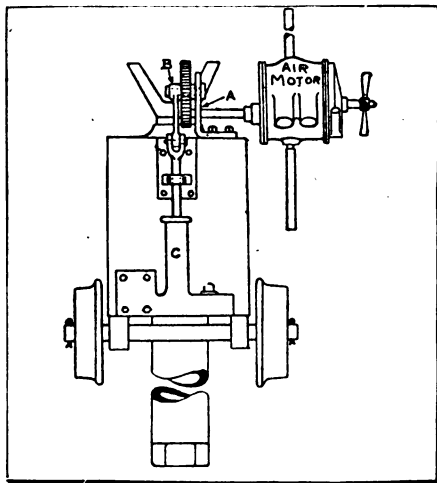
Air Operated Hydraulic Drop Pit Jack.
